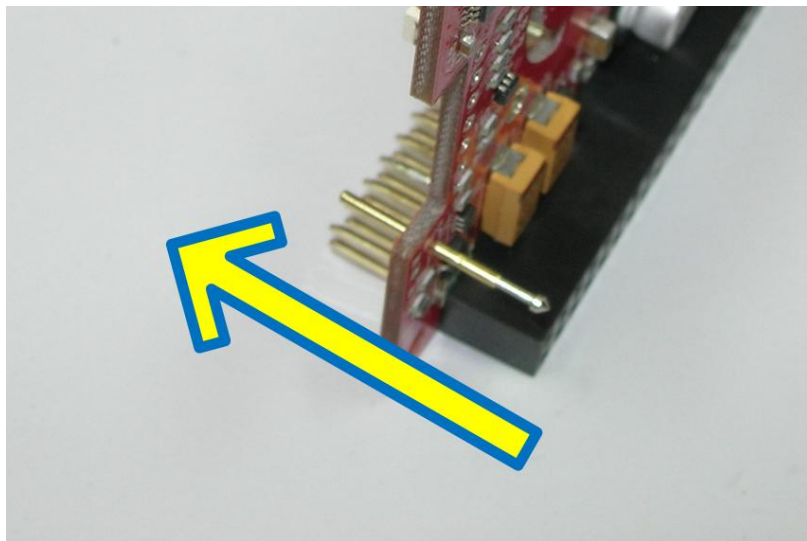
Drag on the Gold Plated Reset Pin through the PCB hole on the direction shown
